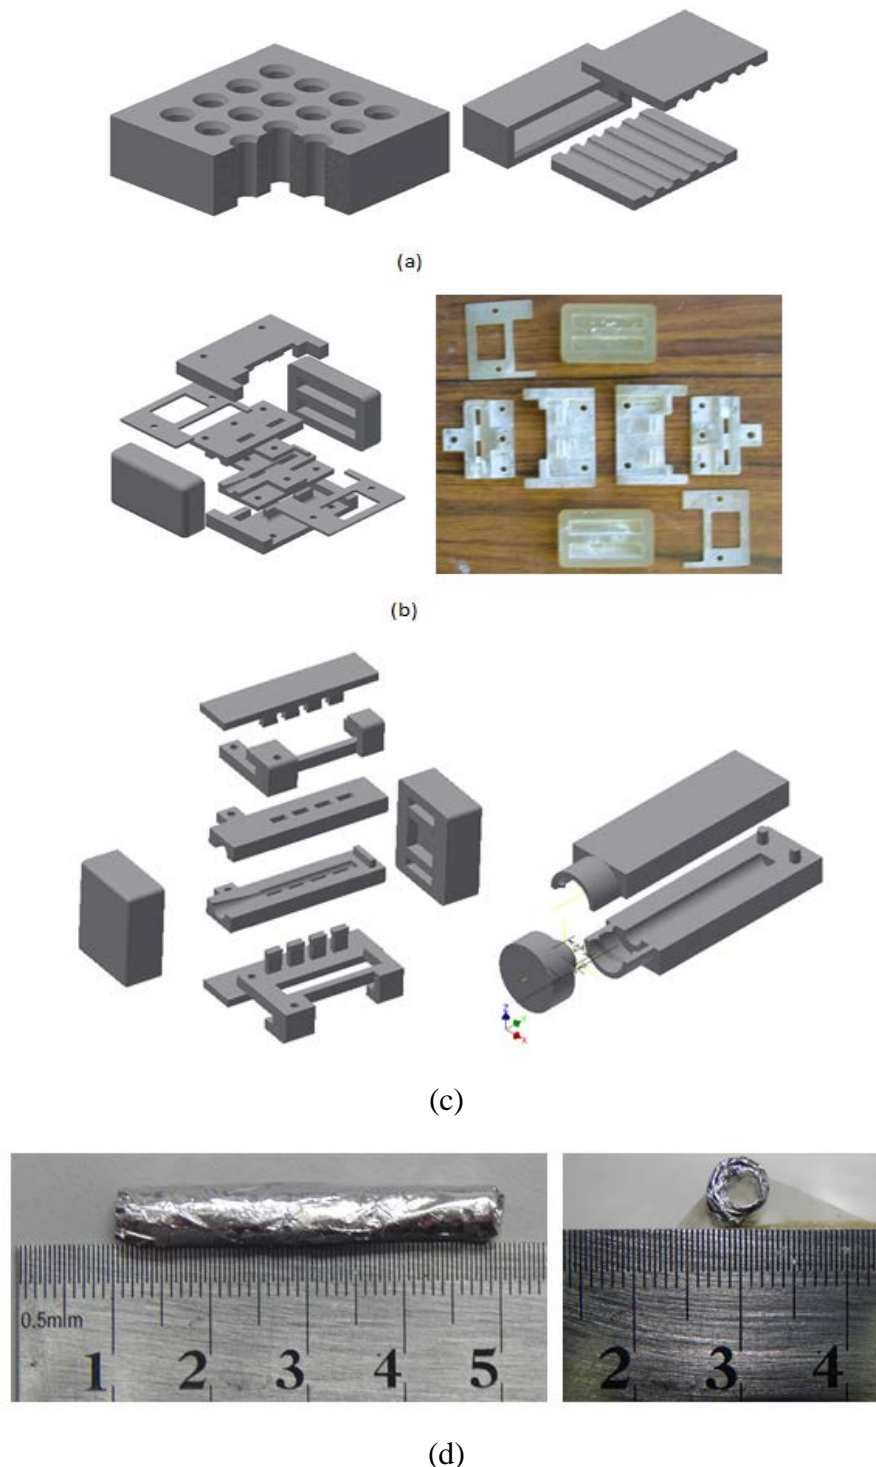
Different moulds designed to assess the viability for used in AW scaffold round specimens fabrication; (a) two different designs for aluminium block mould without ejector, (b) CAD design (left) and SLA mould (right)for moulding system with ejector, (c) alternative CAD designs and (d) simple Al sheet mould.
